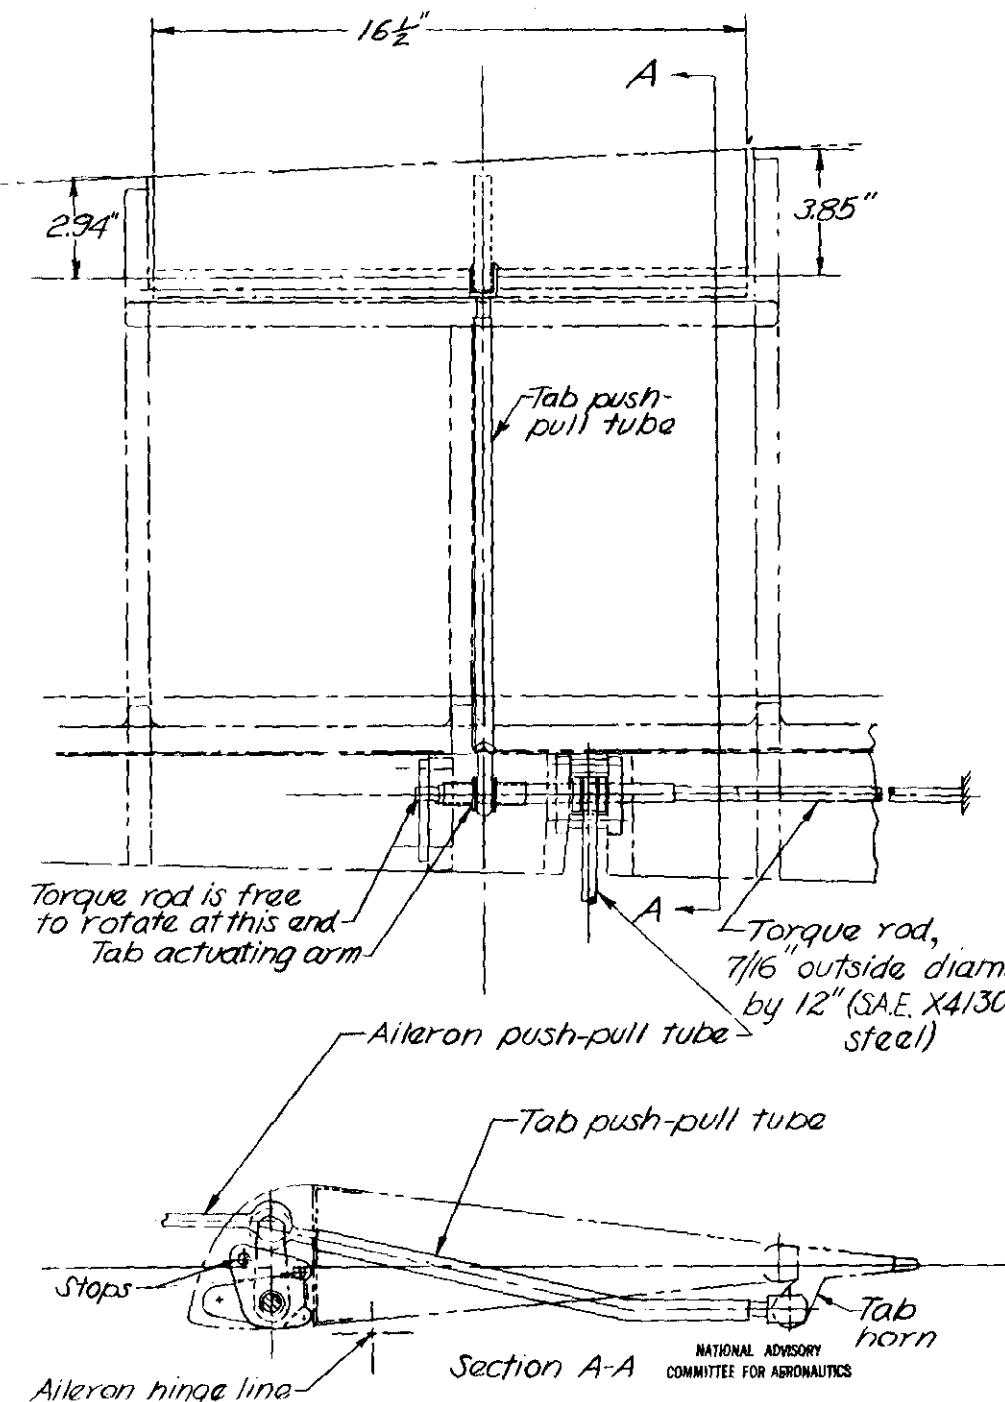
Spring-tab-aileron arrangement of F6F-3 airplane.
